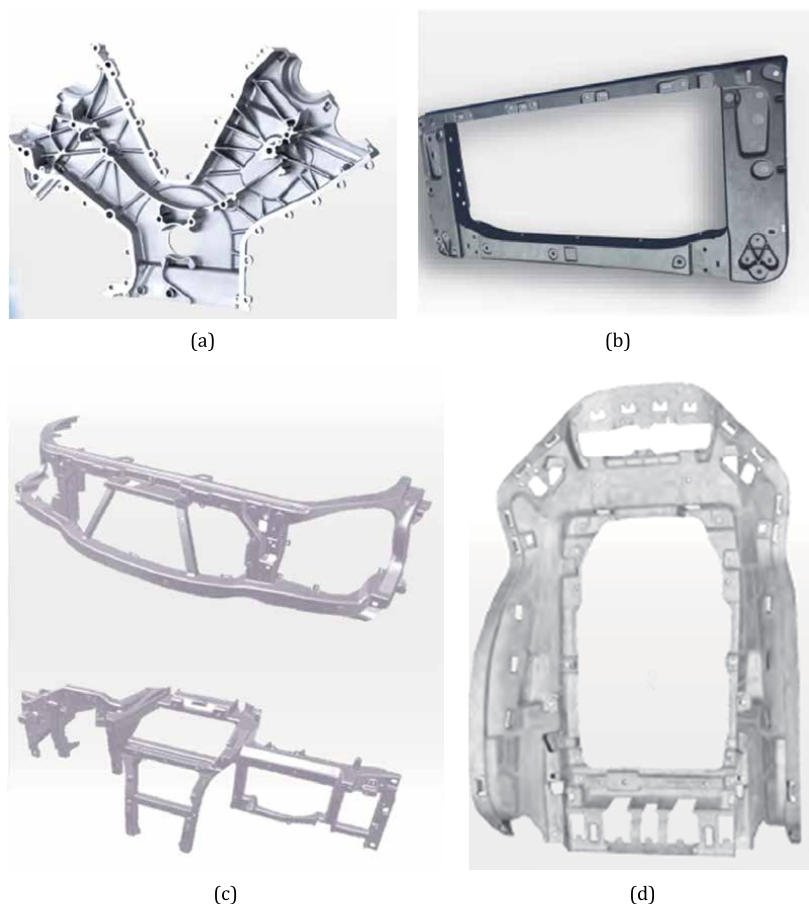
Recent die cast parts from magnesium industry [courtesy of GF Casting Solutions]: (a) Porsche Control Box Cover, made of MgAl₄RE₄ alloy, 2.6 kg weight, realized by multistage process (casting, stamping, machining), then assembled; (b) E-vehicle upper door frame alloy made of AM 50 alloy, 2.9 kg weight, realized by multistage process (casting, punching, machining, e-coating); (c) Ranger Rover Front End & Cross Car beam made of AM60 alloy, 6.0 kg weight realized by the multistage process then assembled (casting, machining, stamping); (d) Daimler SLK 2 seat back frame, AM 50 alloy by die-casting, 2.6 kg weight (courtesy of GF Casting Solution AG).
